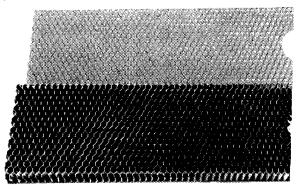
Failure surfaces resulting from peel testing of the Dura-Core honeycomb and JD Lincoln adhesive conditioned 150 days at 70°C/100%R.H., indicating fillet bond pull-out.
